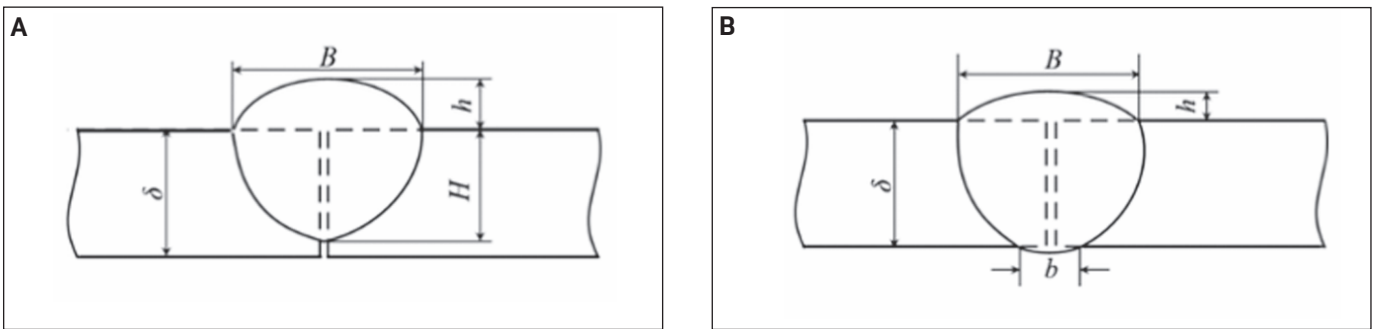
Weld joint penetration: A — Incomplete joint penetration; B — complete joint penetration.
